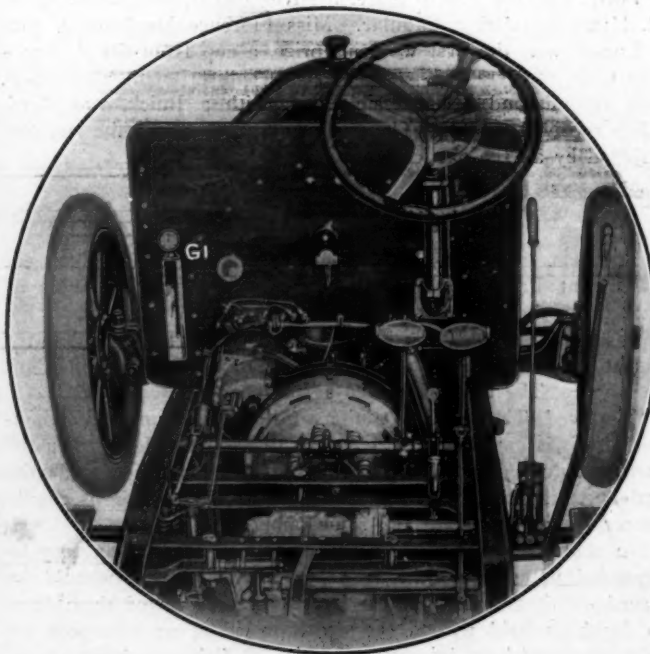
Part view of the chassis, showing the dashboard and various control parts, electric generator flywheel
